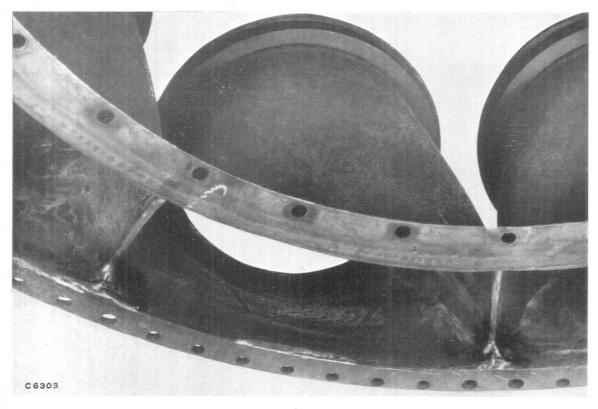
Cracks in the corners of the discharge nozzles — acceptable for further service.
